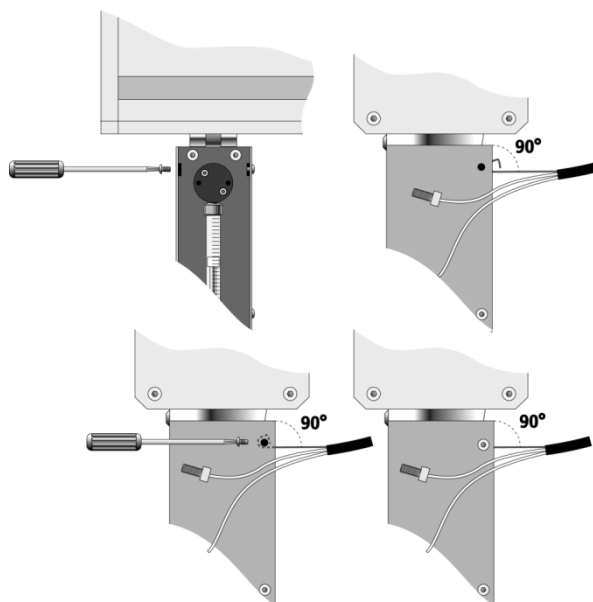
Attaching the Transfer Tubing Kit to the Dilutor Module
